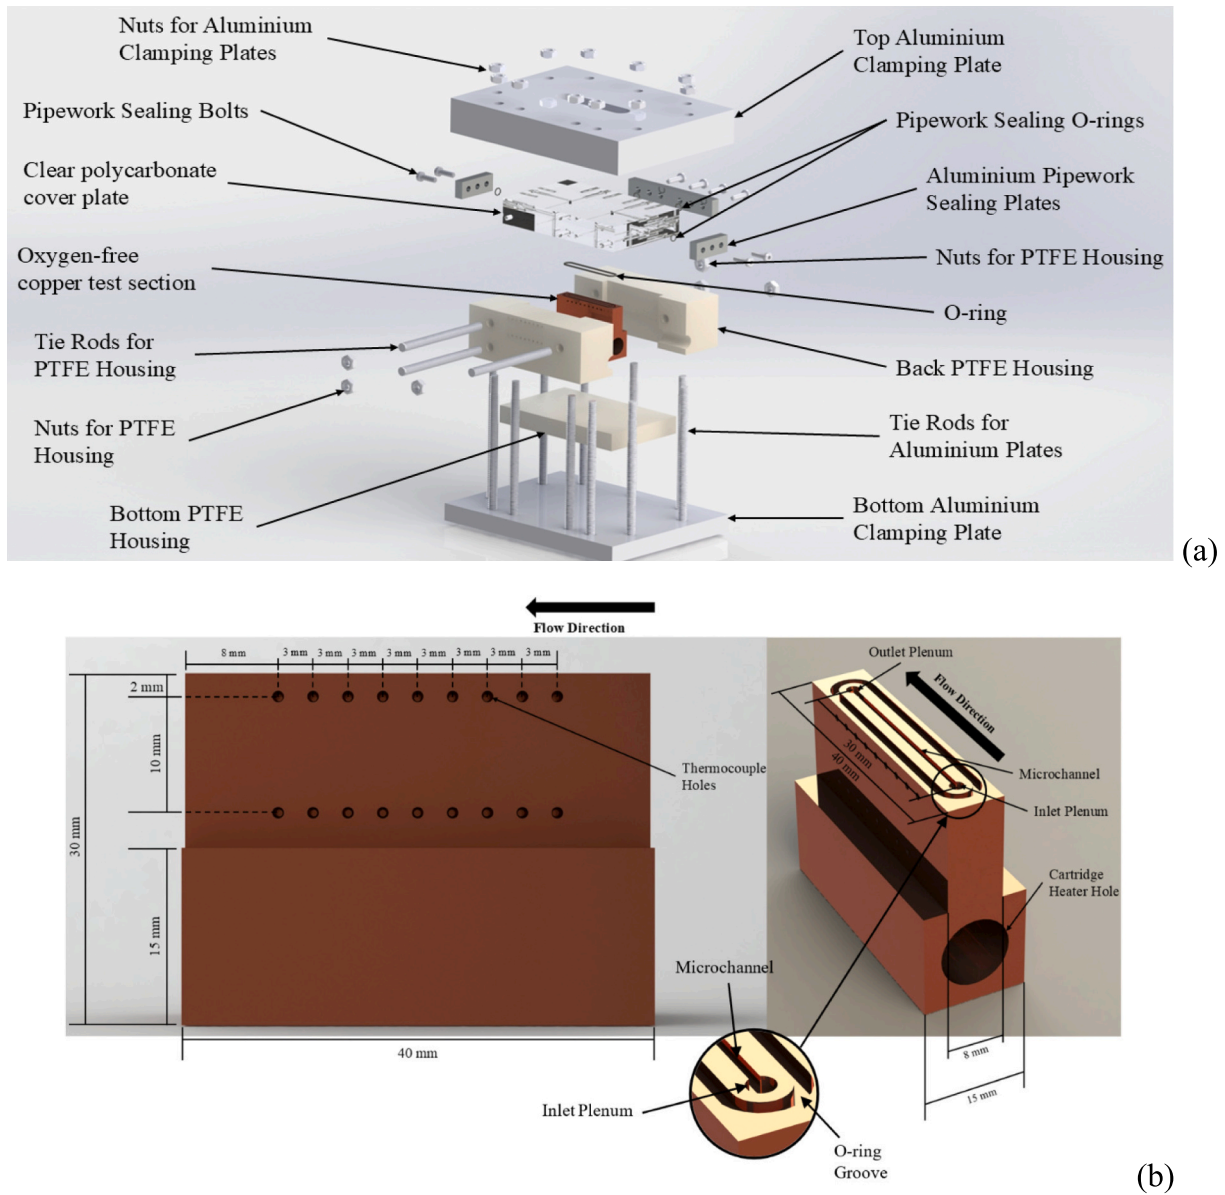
Single channel test section (a) exploded drawing (b) heat sink.
